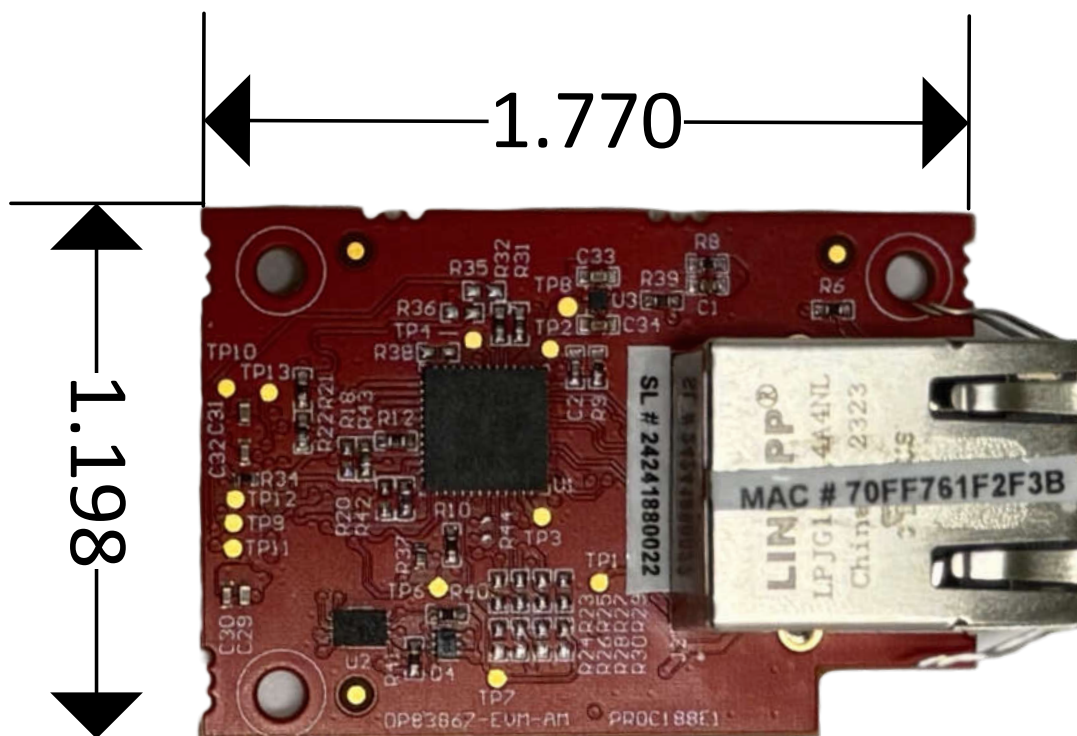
Industrial Ethernet PHY Add-on Board Dimensions
